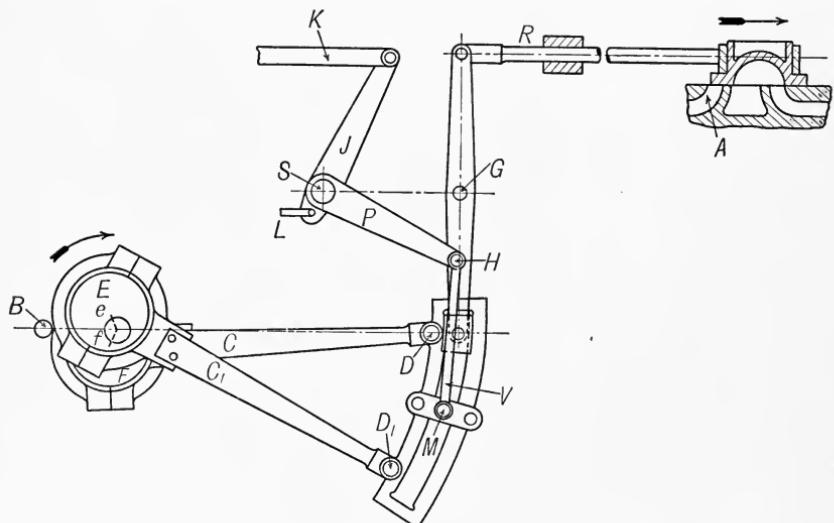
Stephenson Link with Rocker, Full Gear Forward.
